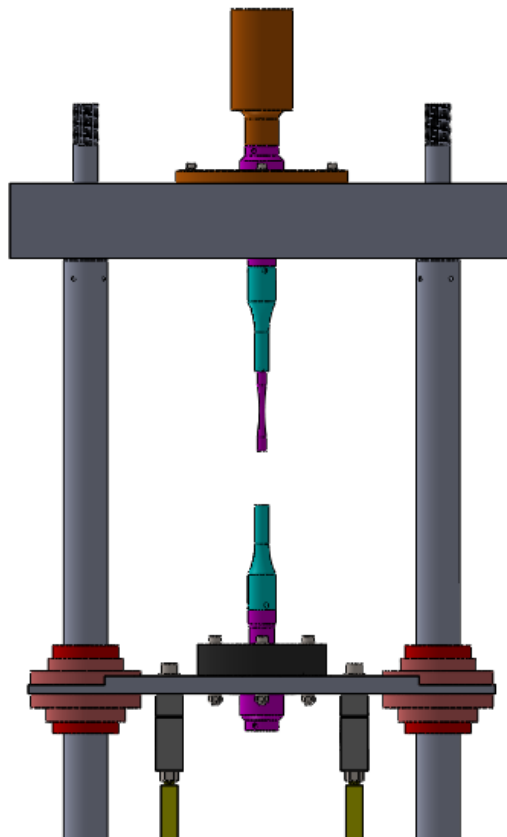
Assembly to realize fully reversed ultrasonic fatigue tests
